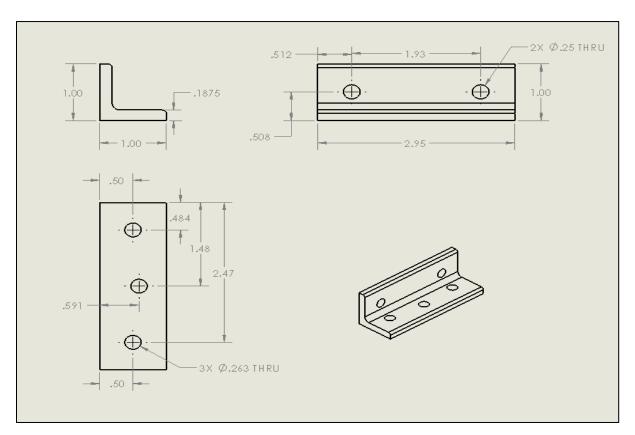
SolidWorks drawing used to make a single motor housing bracket; two are used in a idler roller assembly.
